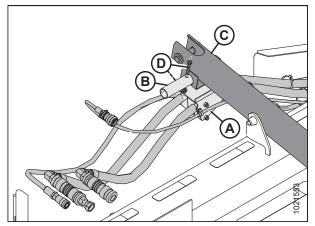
Hose Support Weldment, Storage Position
